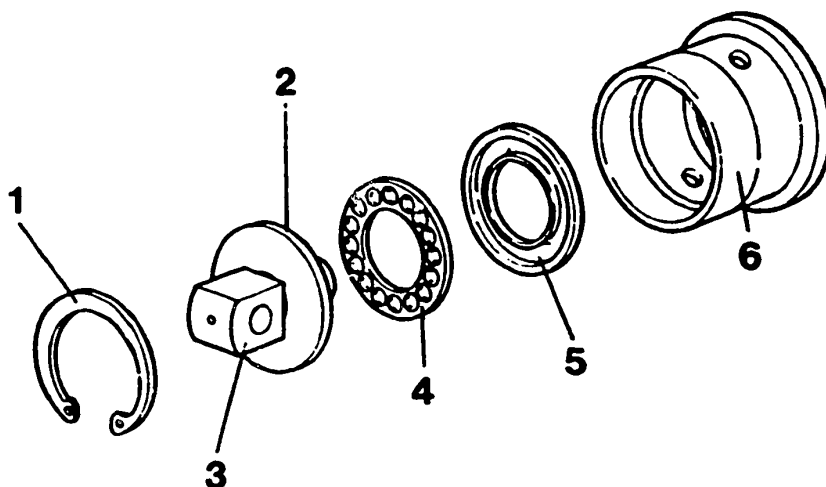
Sliding sleeve, sliding bolt and bearing assembly
